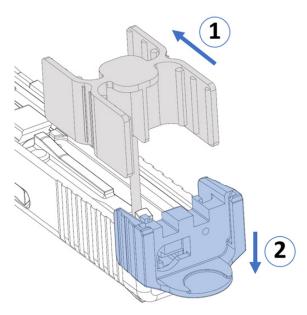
Pushing back the Firing Pin Assembly allows the Backplate to settle into the slide, when the tension is released the Firing Pin Spacer Sleeve will help to hold the Backplate in place.
